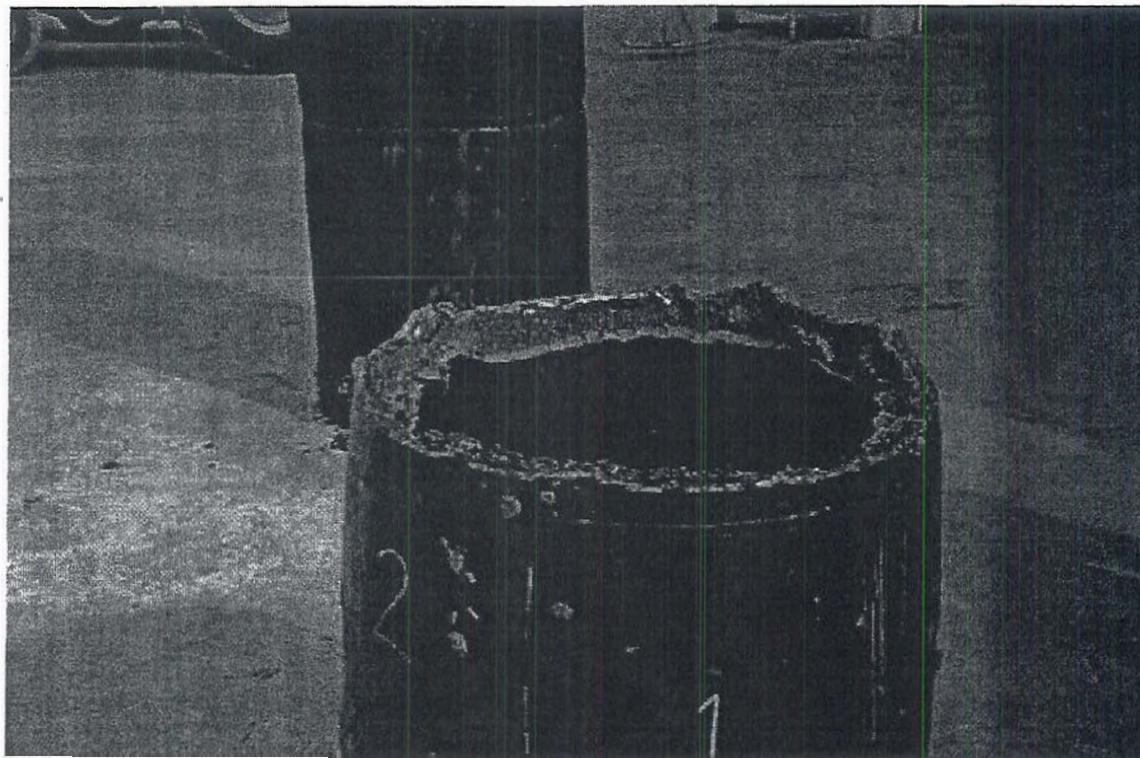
Final test cut from fully submerged pipe at JRC Facility, Alvarado Texas.
